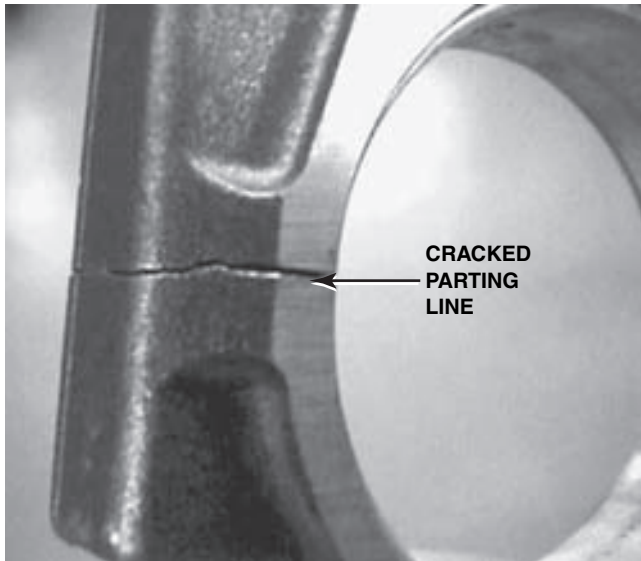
Powdered metal connecting rods feature a fractured parting line at the big end of the rod.
